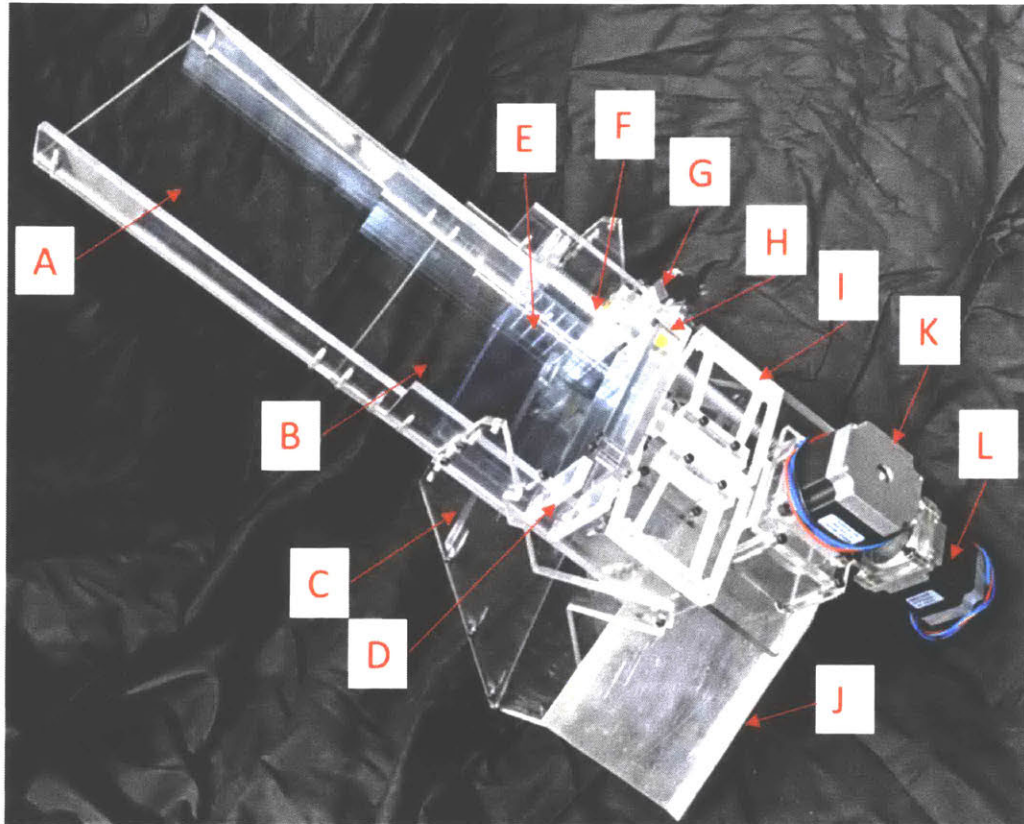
Left side isometric view of prototype IV. A) Tray queue. B) Chassis. C) Angle bracket mount. D) Vial entrance gate. E) Tray. F) Tray slider lead screw. G) Biasing mechanism. H) Rake. I) Flexure. J) Tray exit ramp. K) Cam mechanism. L) Tray slider lead screw stepper motor.
